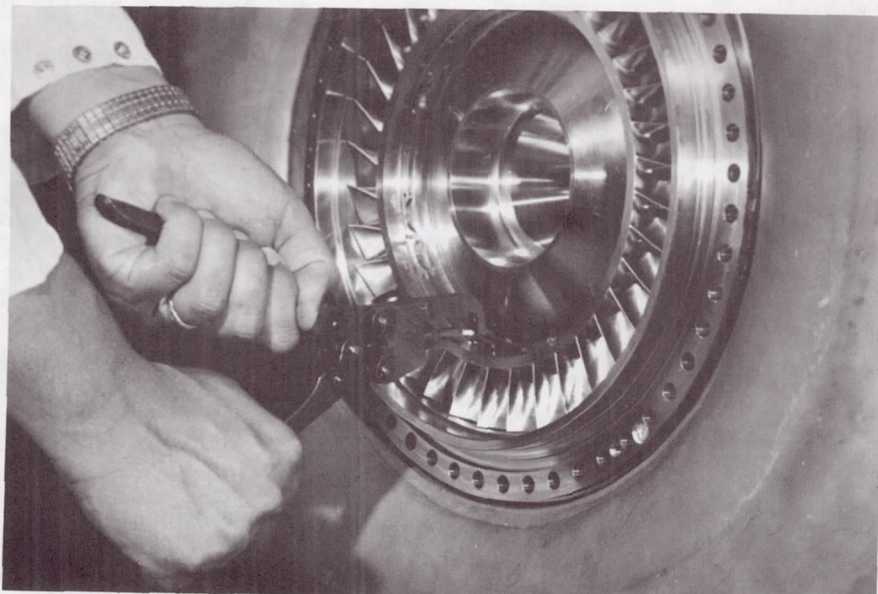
Installing Balance Rivets in Turbine Wheel (CN-9539)
